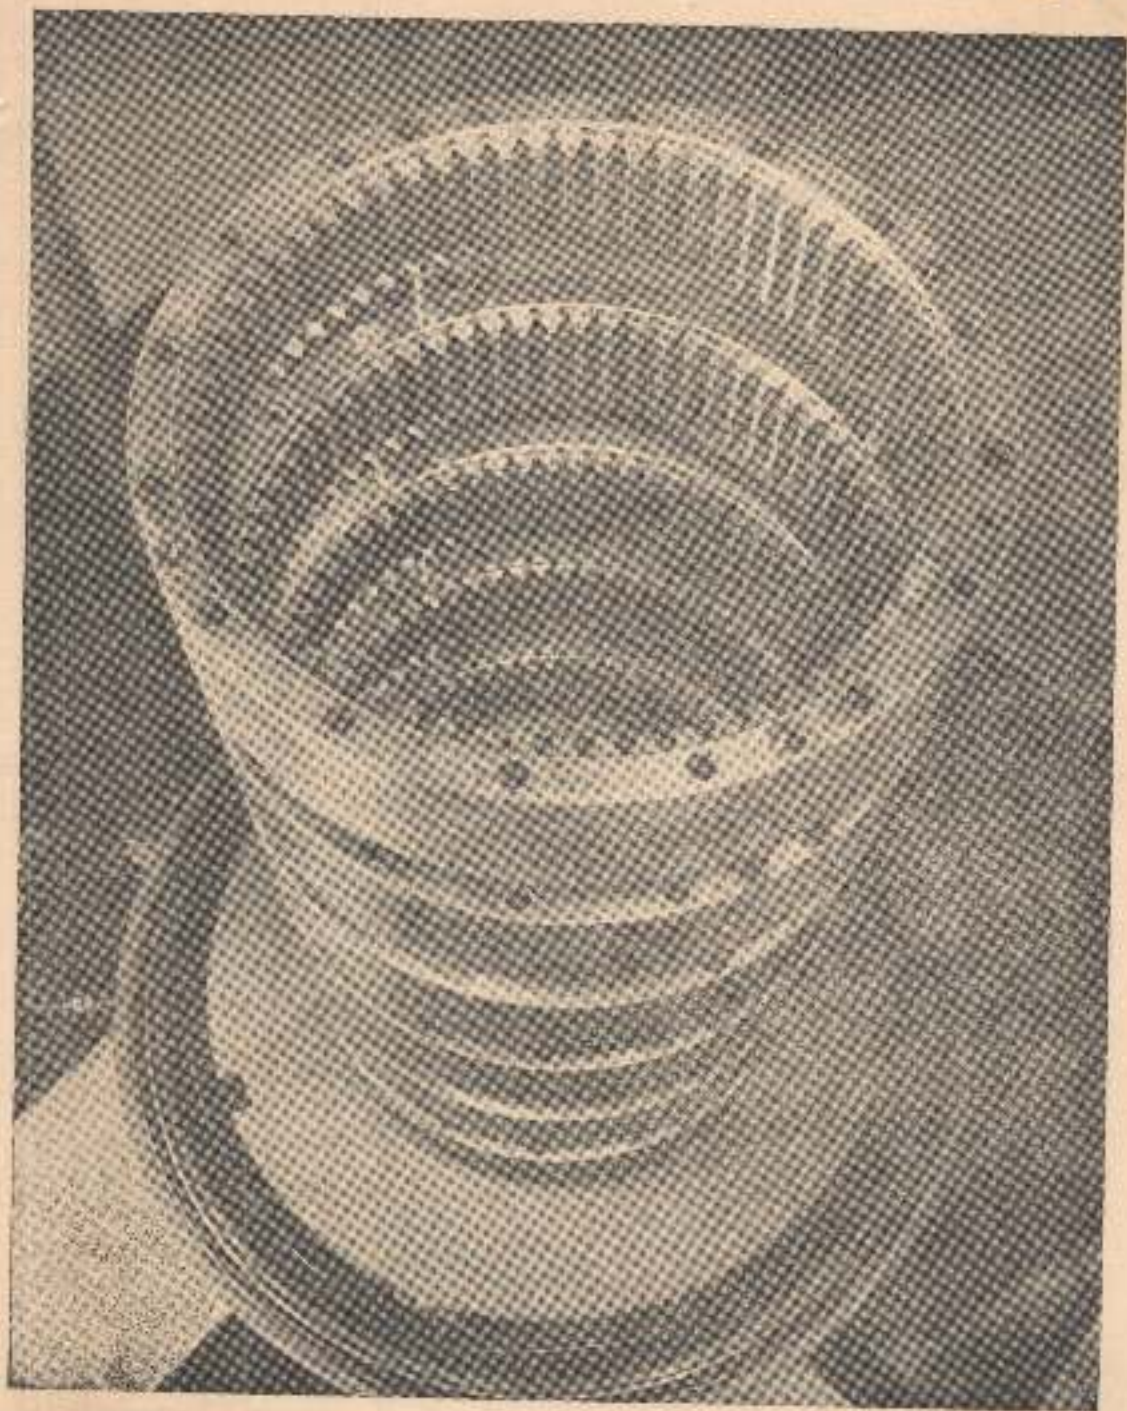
A charge of six helical gears in position on the furnace hearth prior to the lowering of the external chamber. (Courtesy: Consare Engineering Ltd, Scotland.)
